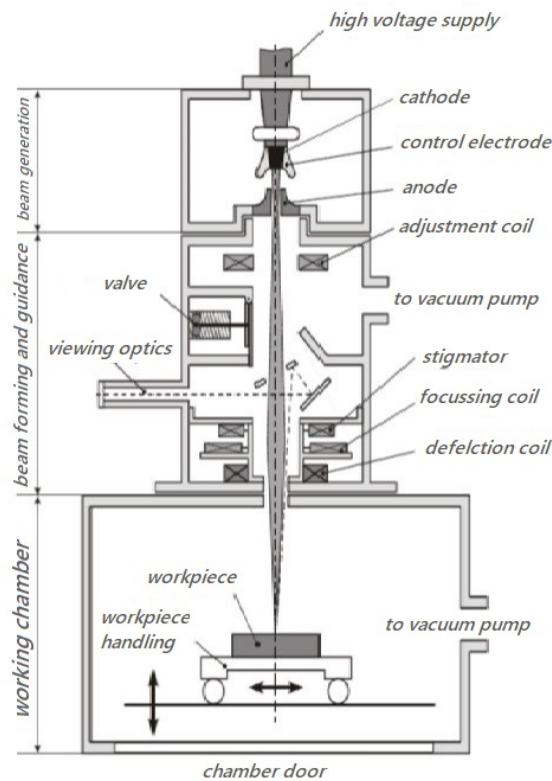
Schematic view of an electron beam welding machine [20].
